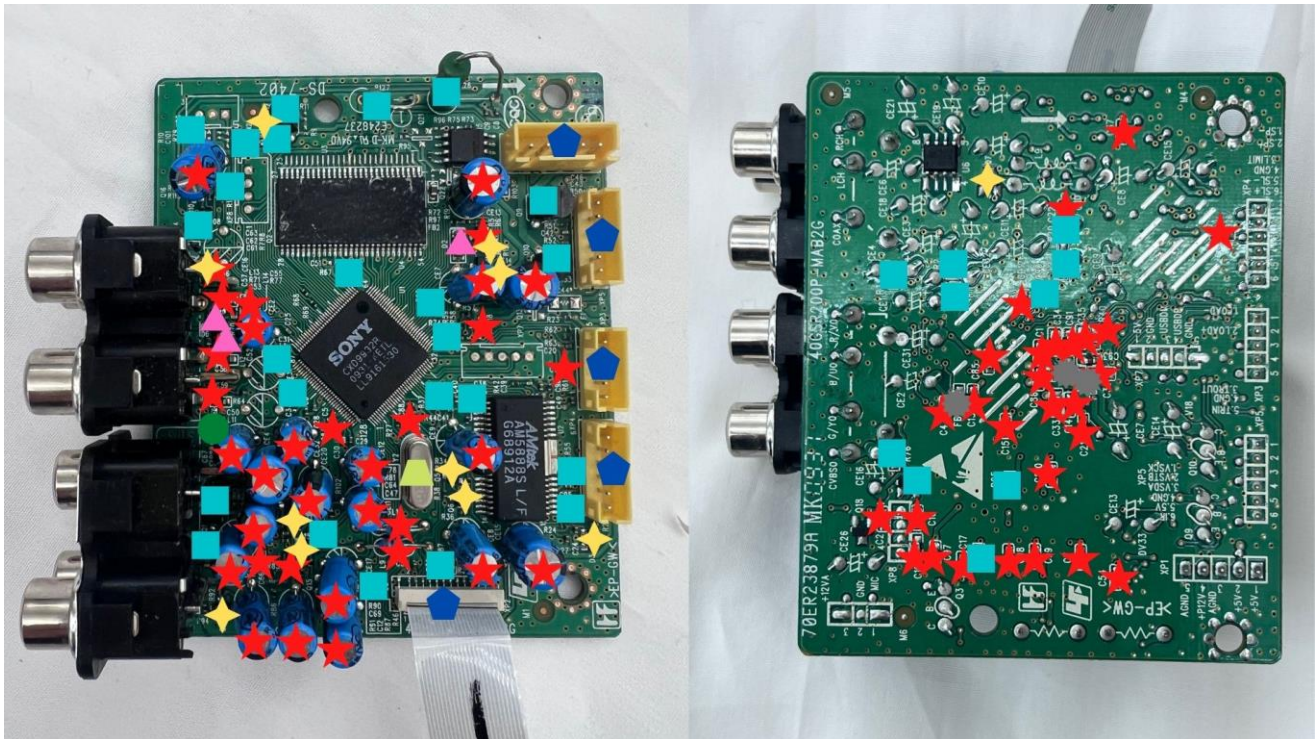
Electrical component locations on Microcontroller Board. On the left is the front side of Microcontroller Board, and on the right side is the bottom side of Microcontroller Board.
